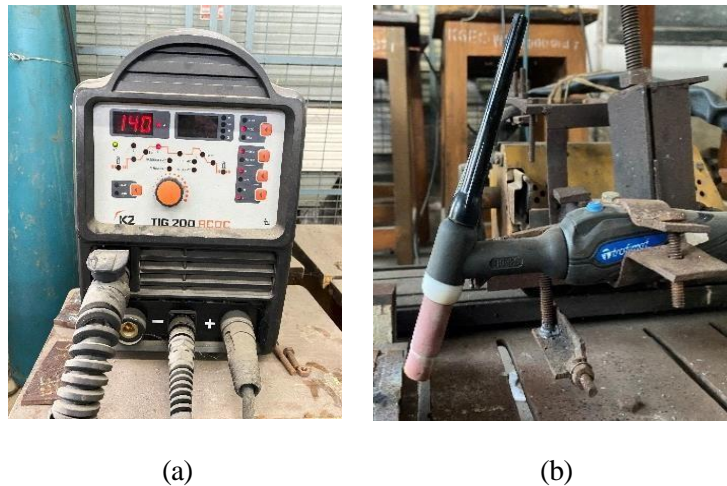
(a) GTAW Machine used, (b) Torch angle set at 75°
